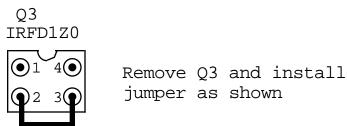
BUSY output modification (Rev F and lower PCBs only)
